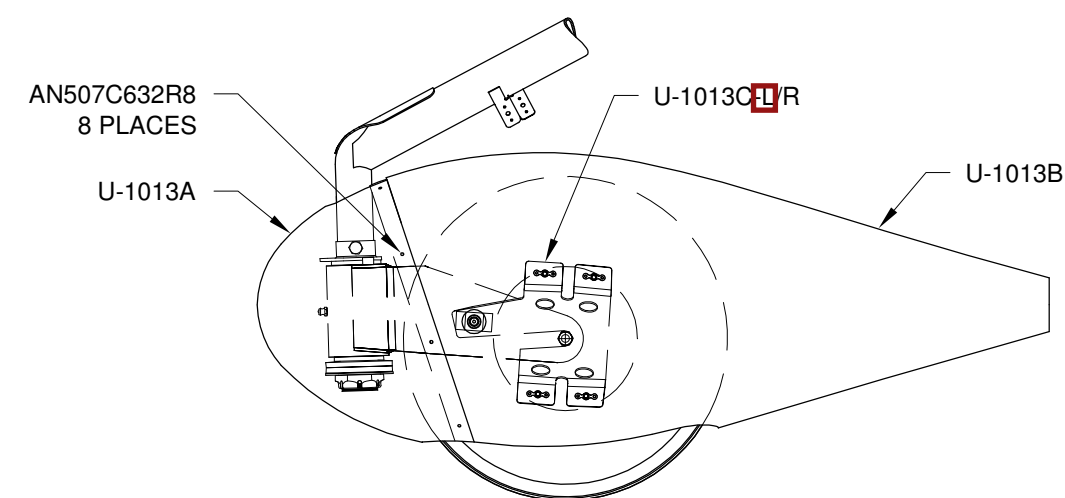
RIVETING NUTPLATES TO THE WHEEL FAIRING REAR
